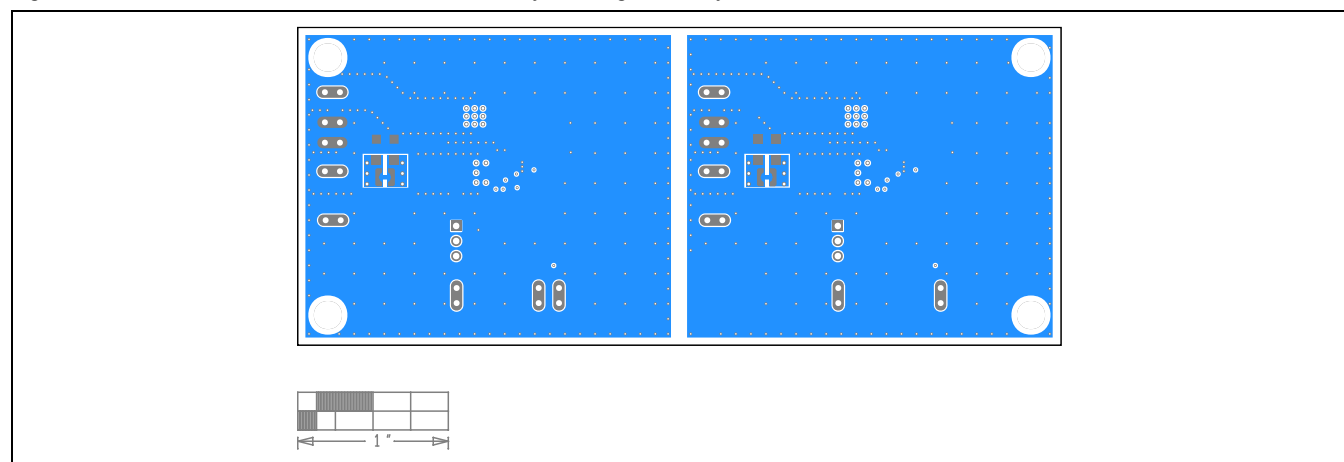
MAX17570A/MAX17570D EV Kits PCB Layout Diagram—Bottom Layer
